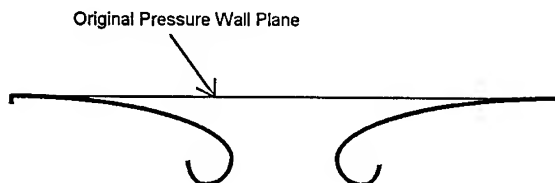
Advanced Stage of Pressure Wall Cracking with Petals Shown
